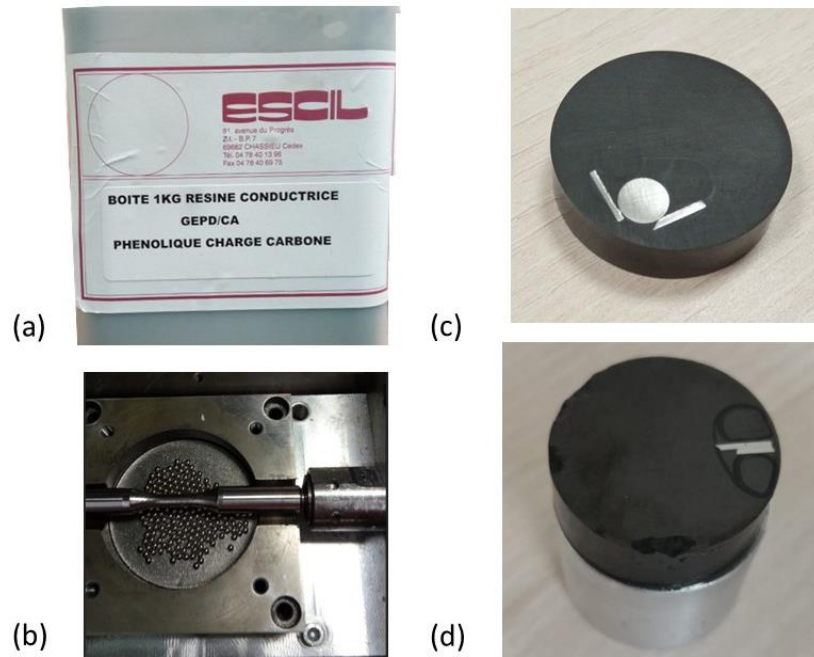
(a) Conductive carbon resin used for the molding of the sample, (b) Example of treated sample after SMAT and (c) Piece cut from the dumbbell sample and molded in resin and (d) Pieces cut from the sheet sample.
